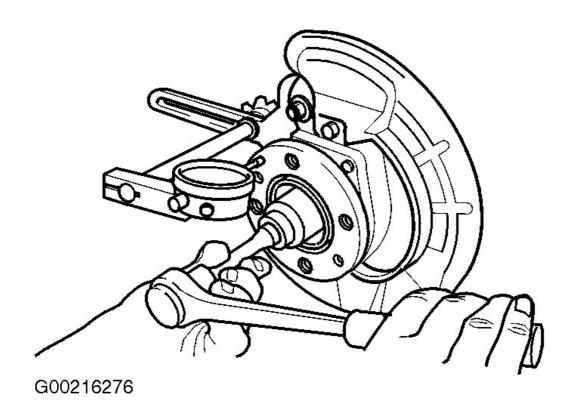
Measuring Hub Lateral Run-Out (Front Hub Shown; Rear Similar) Courtesy of VOLVO CARS OF NORTH AMERICA.
